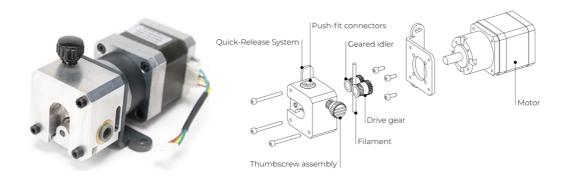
Sigma motor (a) [30] and its isometric CAD view (b) [31]
